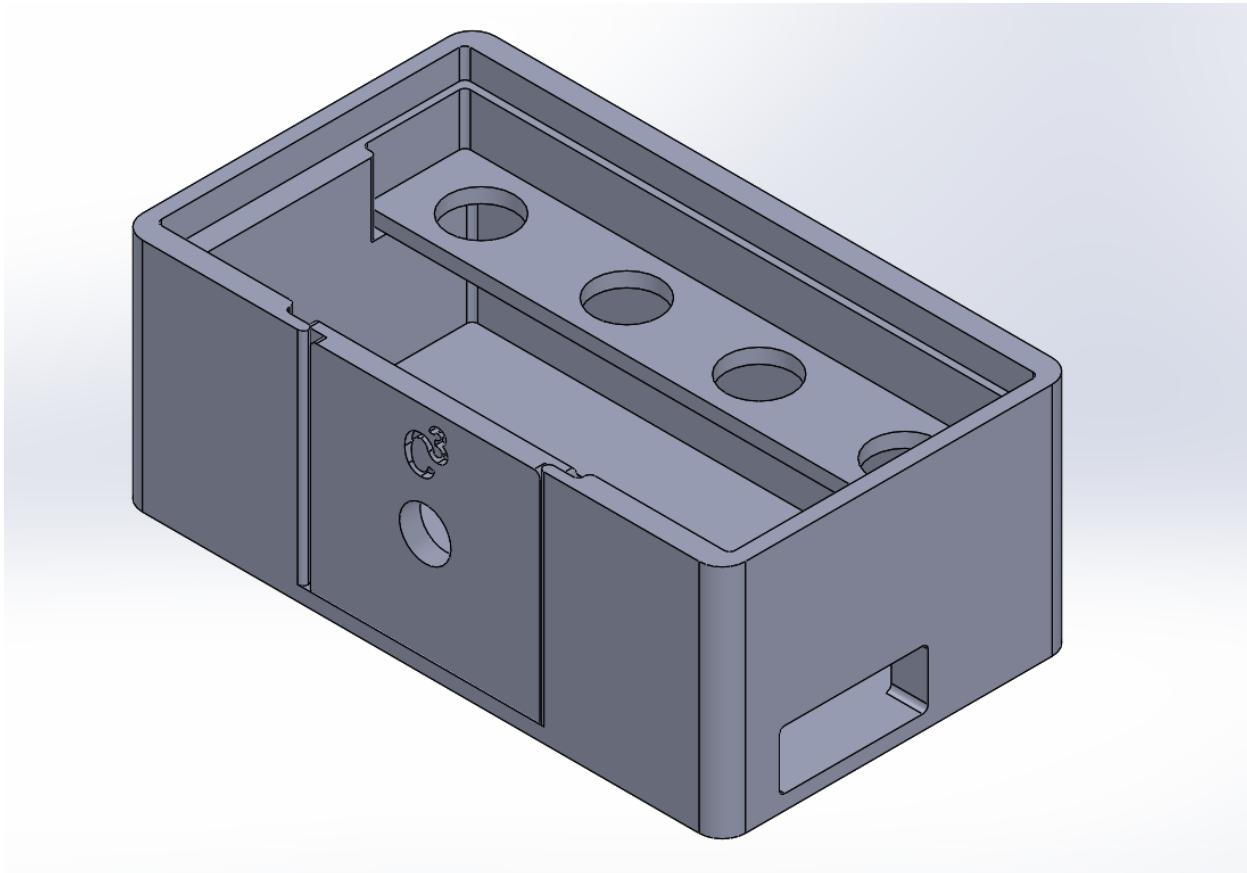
Solidworks Part Design for Arduino Pump System (Hose Mount, Pump Mount, and Case)
